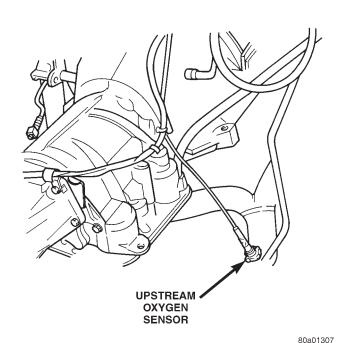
Upstream Oxygen Sensor Location—5.2L
